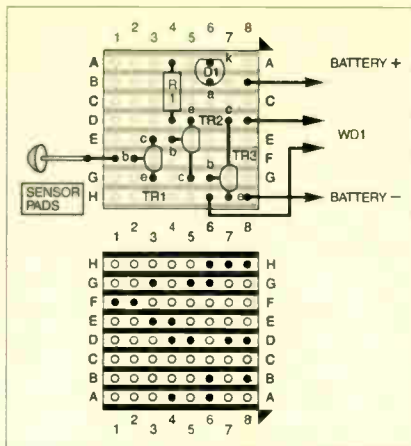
Live Wire Detector stripboard component layout and completed prototype circuit board. Note there are no breaks in the underside copper strips.
